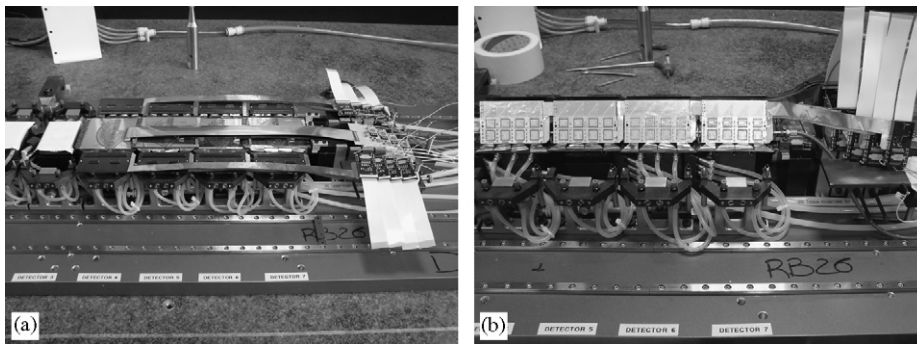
The four SDD modules assembled under the Mitutoyo machine: (a) before placing ladder on top of them, (b) with hybrids clipped to the cooling tubes.
